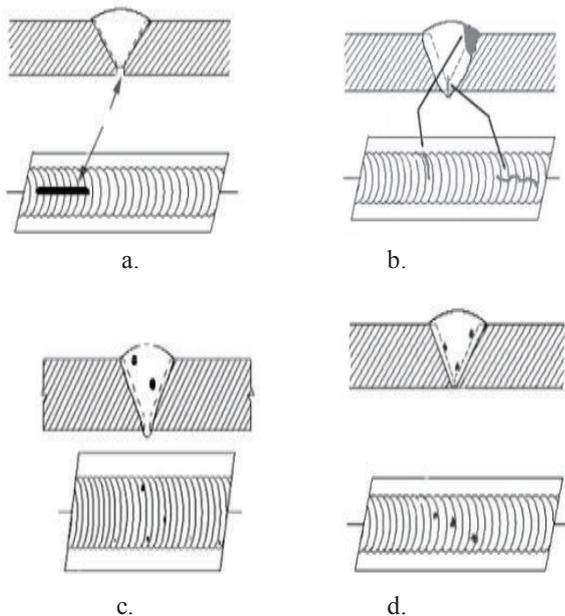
Weld defects. (a) crack; (b) lack of penetration, (c) porosity, (d) slag inclusion.
